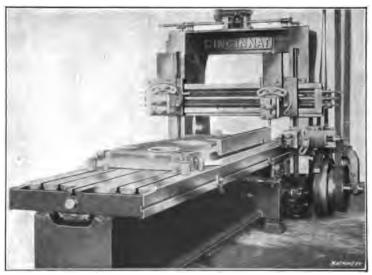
Planing Top Edge and Side of Casting-Illustrating use of Side-head
